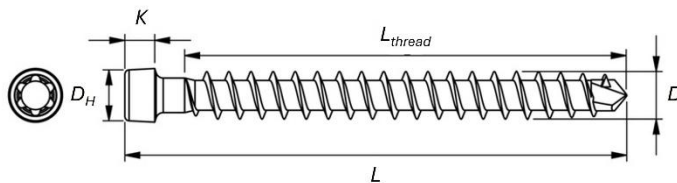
ASSYplus VG 4 SCREW WITH CYLINDRICAL HEAD (CH)
